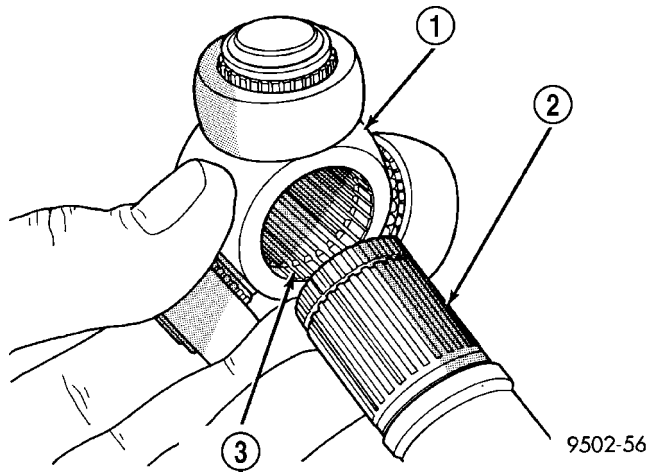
Spider Assembly Installation on Interconnecting Shaft
